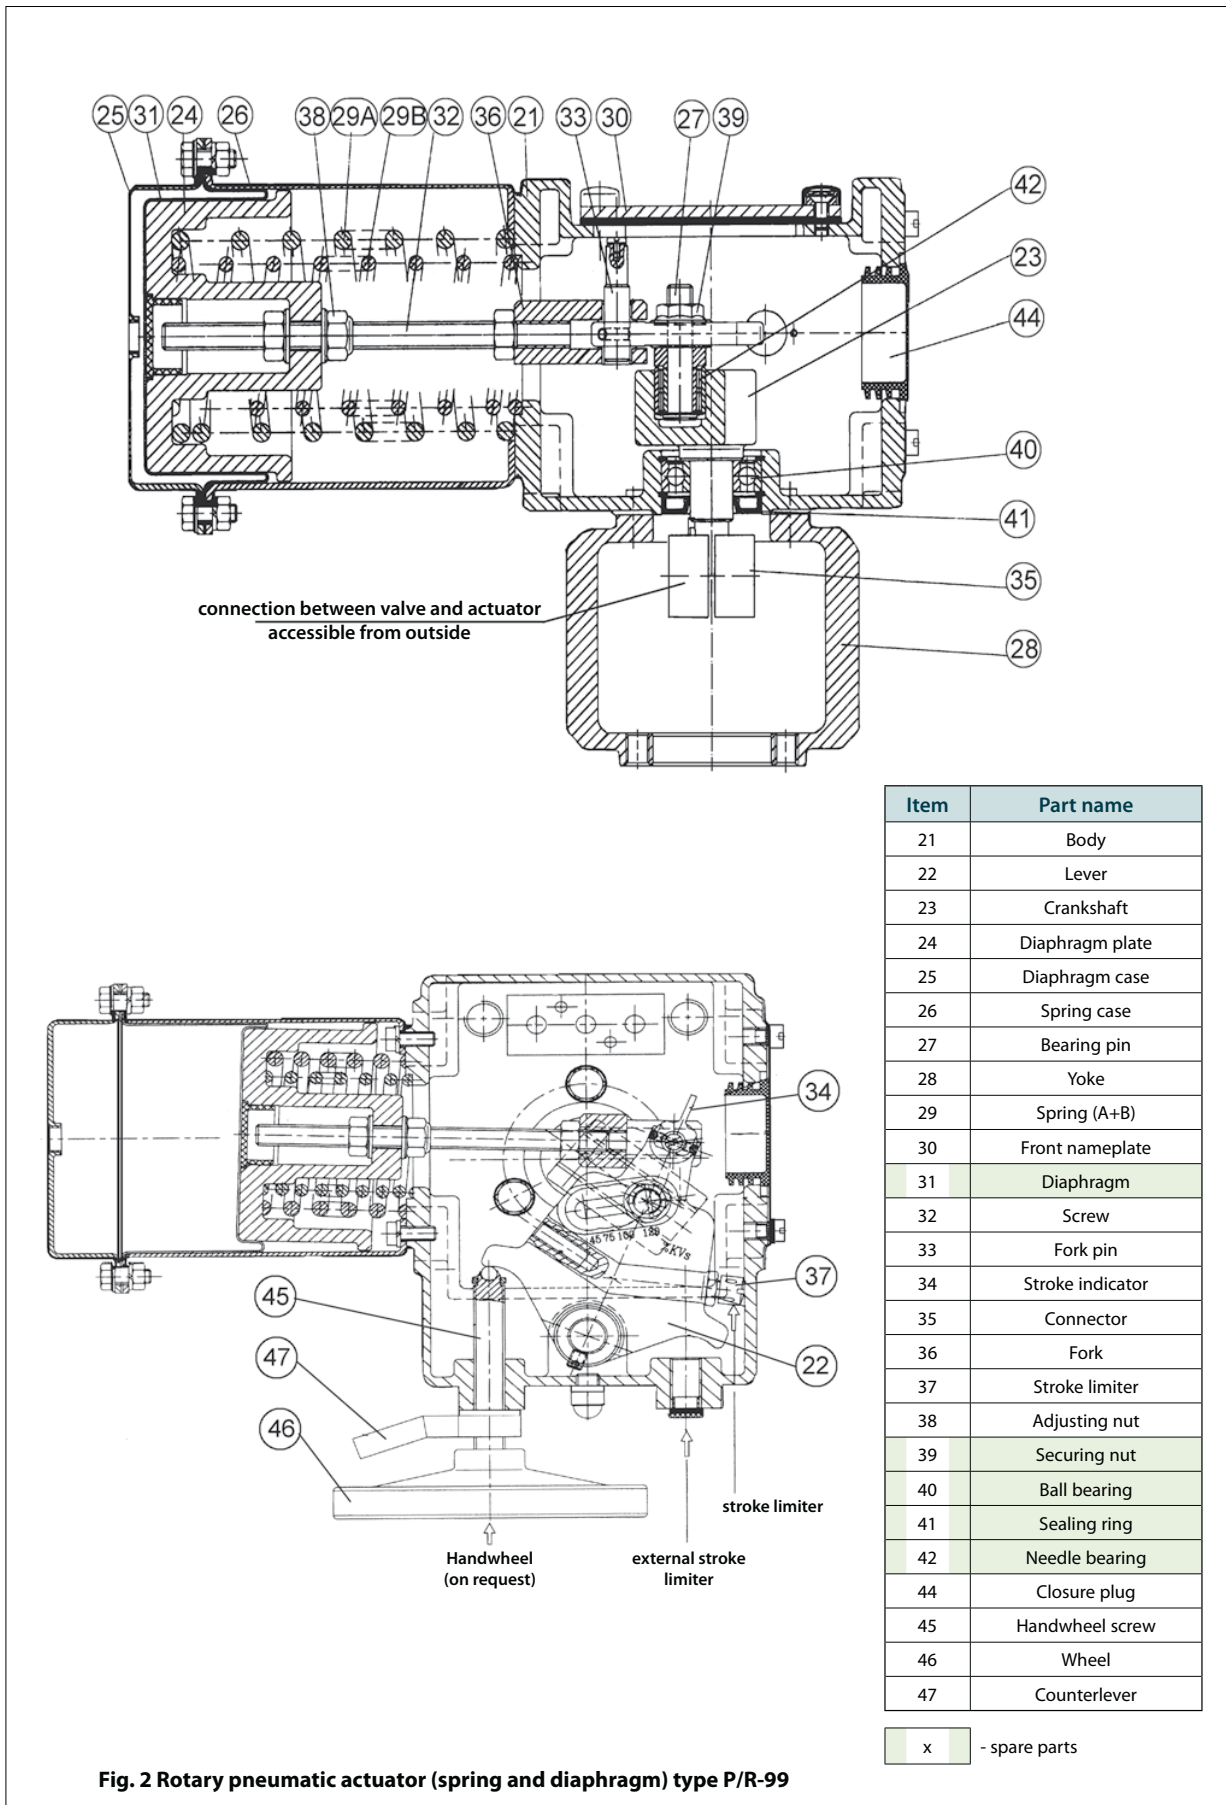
Rotary pneumatic actuator (spring and diaphragm) type P/R-99
